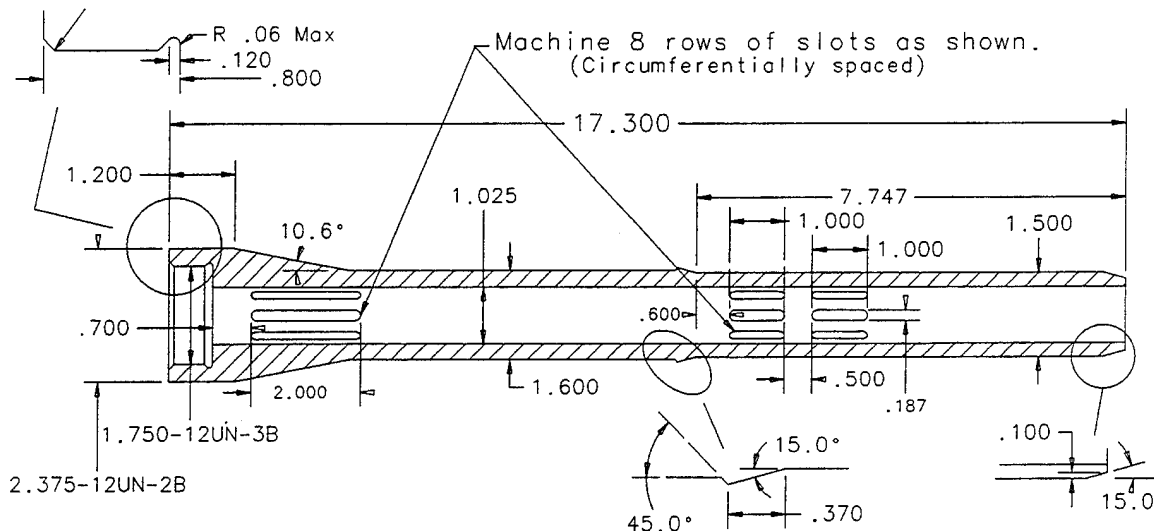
Slotted Barrel Extension (Dimensions in Inches).
